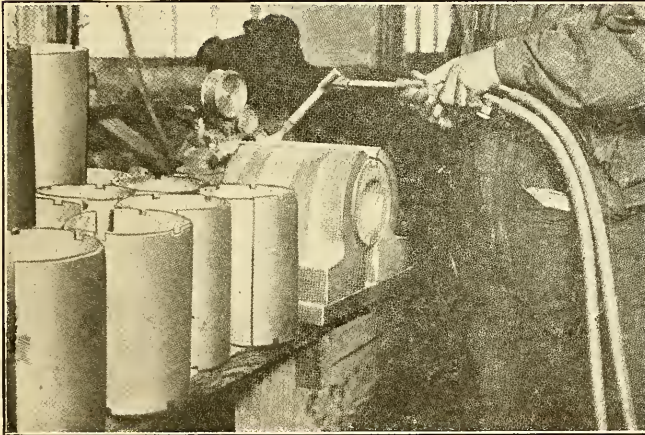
A Sheet-Metal Roller Welding Jig.
